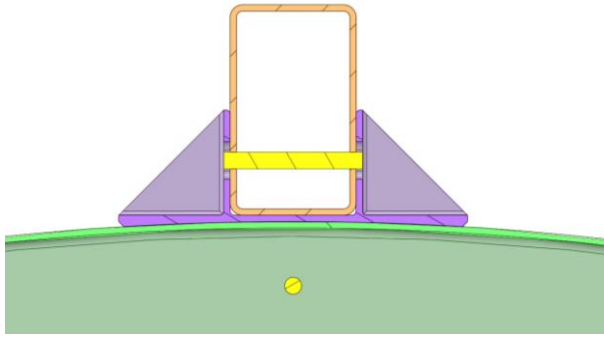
Cross-section of the bracket connection. The inner contact surface follows the radius of the ring.
